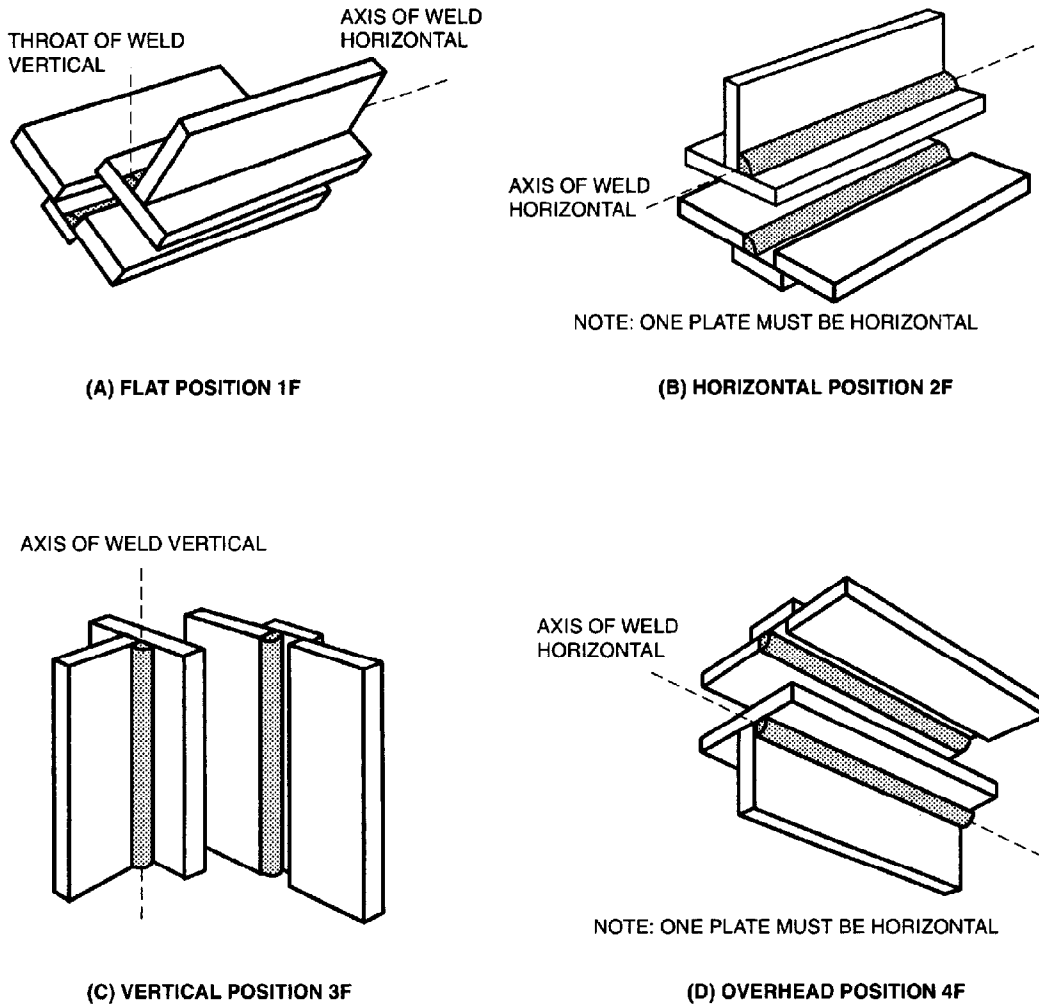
Positions of Test Plate for Fillet Welds (see 4.2.4)
